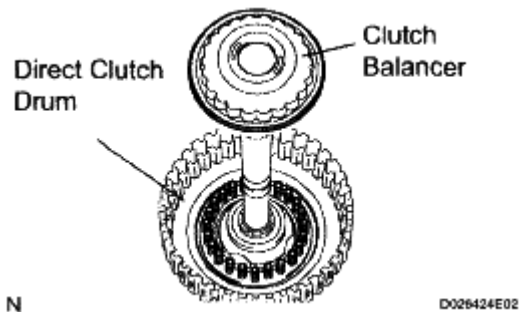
Identifying Clutch Balancer And Direct Clutch Drum
